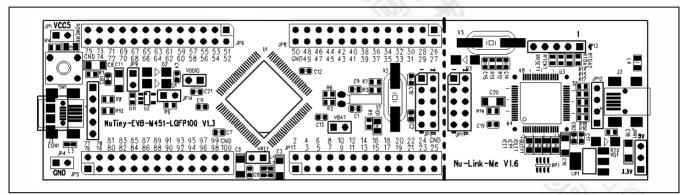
NuTiny-SDK-M453 PCB Placement
